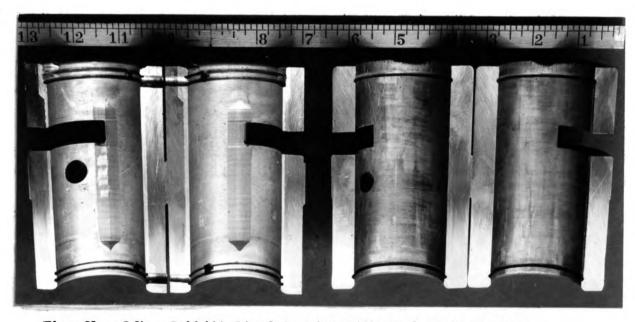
Lft.- Babbitt Lined Bearing With Good Dist. Grooves, but Slightly Short. Rt.- Bronze Bearing Without Dist. Grooves.
